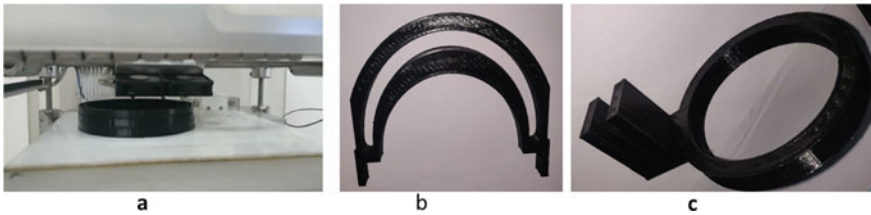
a 3D printing of shoulder part of the exoskeleton, b 3D-printed sliding pair part, c 3D-printed forearm outer cage part
